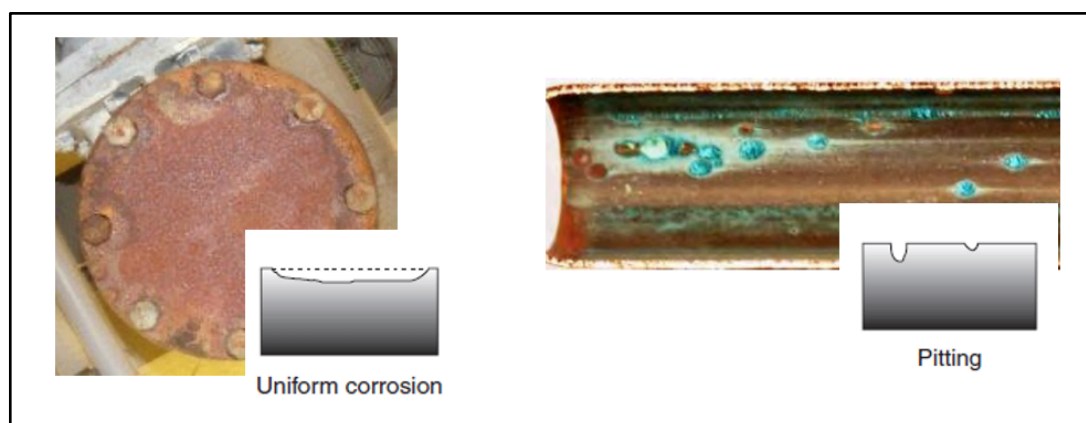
Schematic representation [14] and surface figure of (a) General (uniform) corrosion [15], (b) Pitting corrosion [16]
